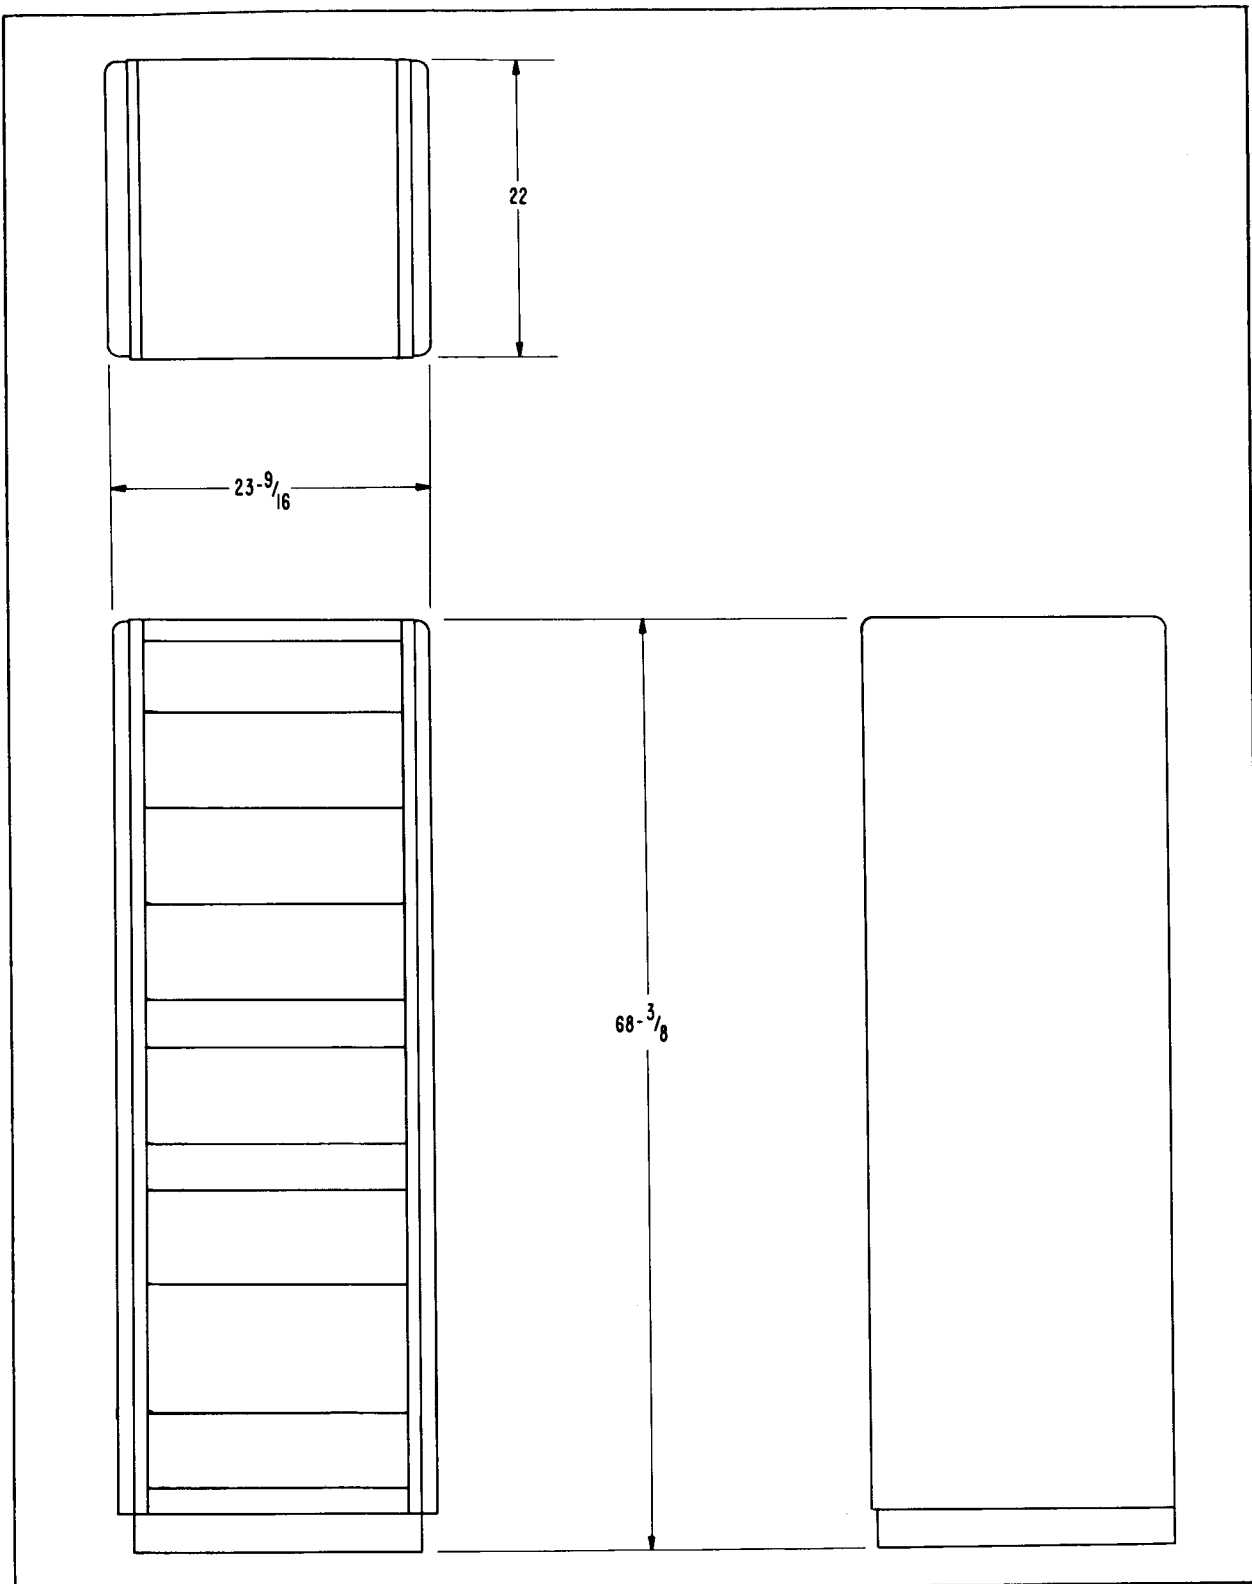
Synchro Remoting Transmitter - Receiver Outline Dimensions
